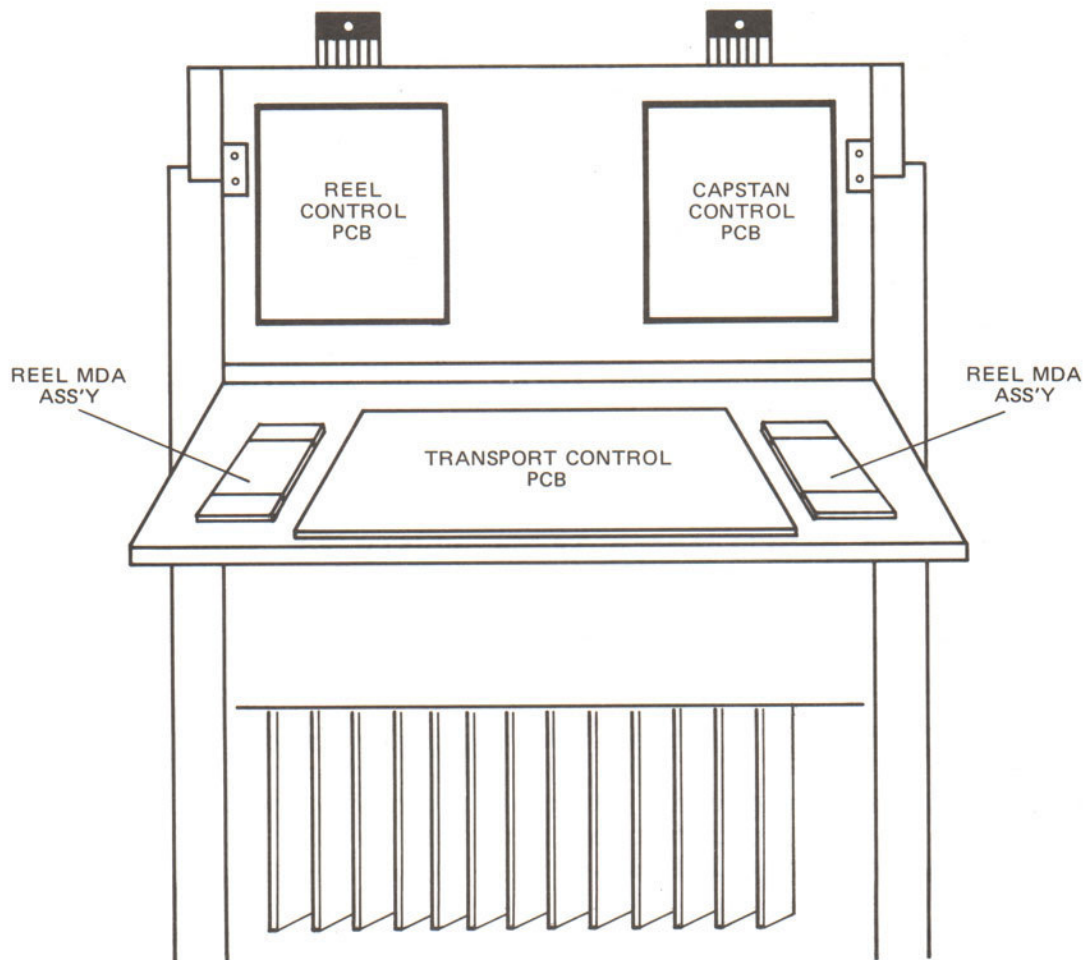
Location of Transport, Capstan, and Reel Control PCBs
